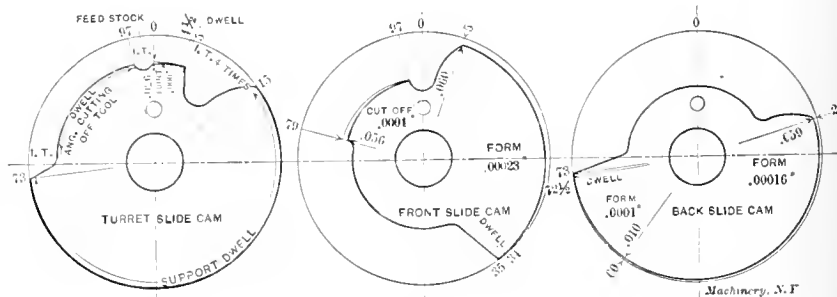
Turret and Cross Slide Cams used for Making the Pinion Blank shown in Fig. 1.
